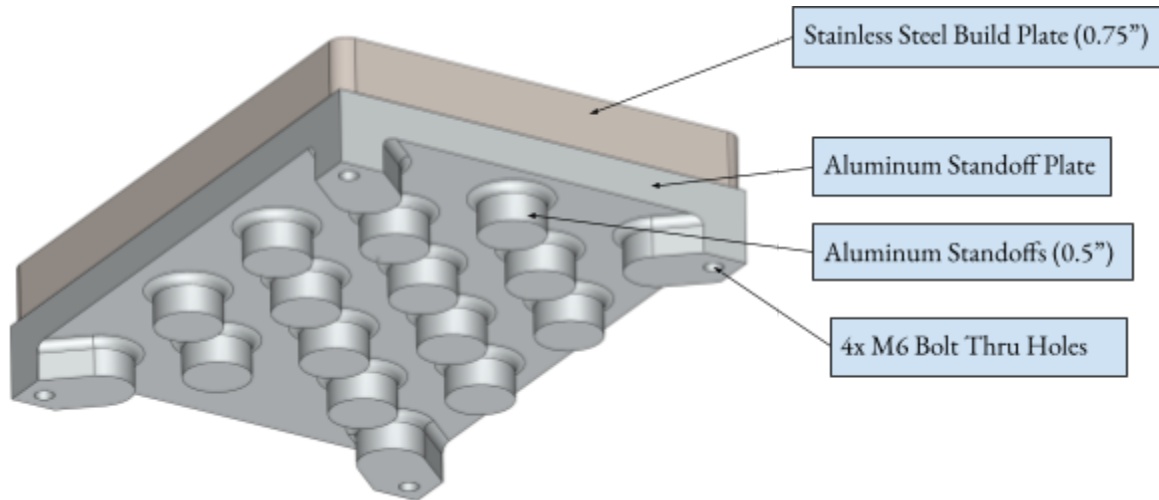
Final Workpiece Fixturing System CAD, viewed from underneath
